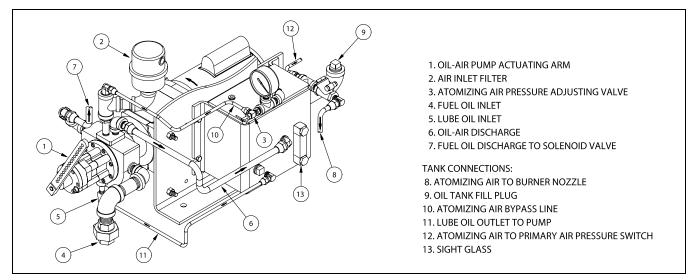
Oil Metering Pump and Tank Assembly, Integral Compressor
